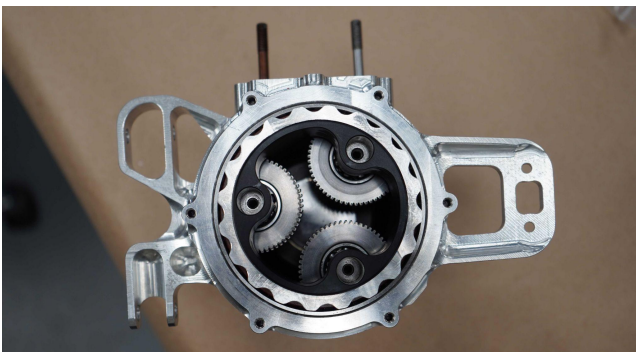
R4X (MR23) Assembly – Axis of the Wheel
